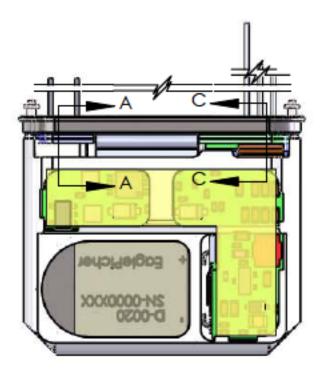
IPG Internal structure with battery, PCBA, plastic support and feedthrough assembly
